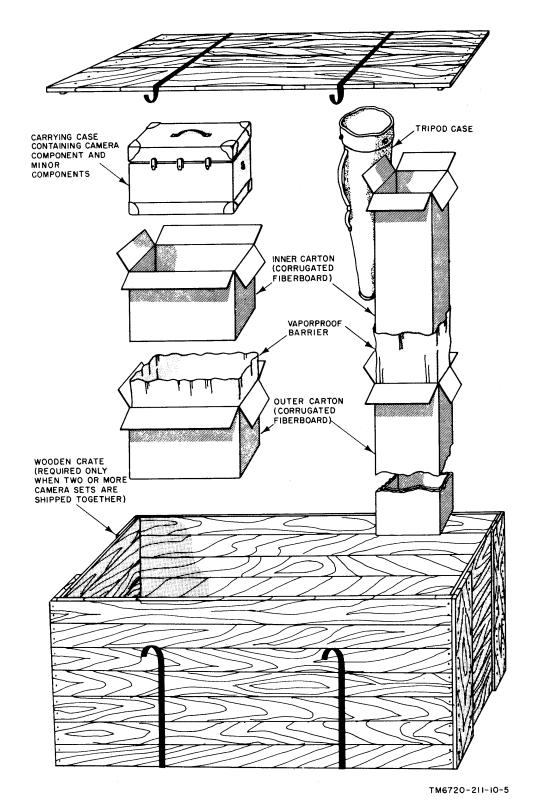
Camera Set, Still Picture KS-17A, packaging diagram.
